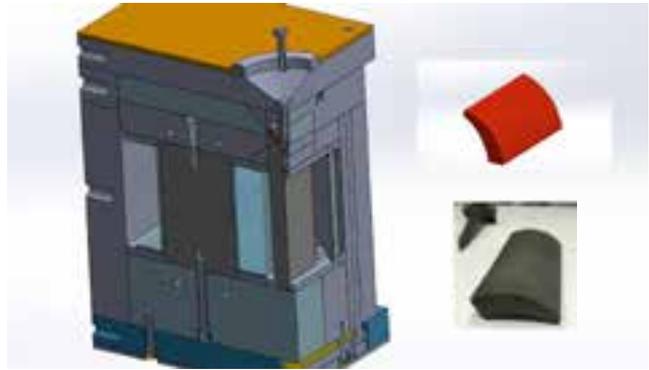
Left: Magnetizing mold, right: specially shaped magnet, design and injection molded
